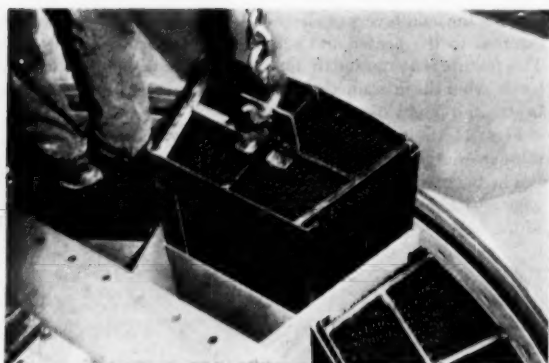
HOT-LAYER BASKET BEING LOWERED INTO ROTOR
